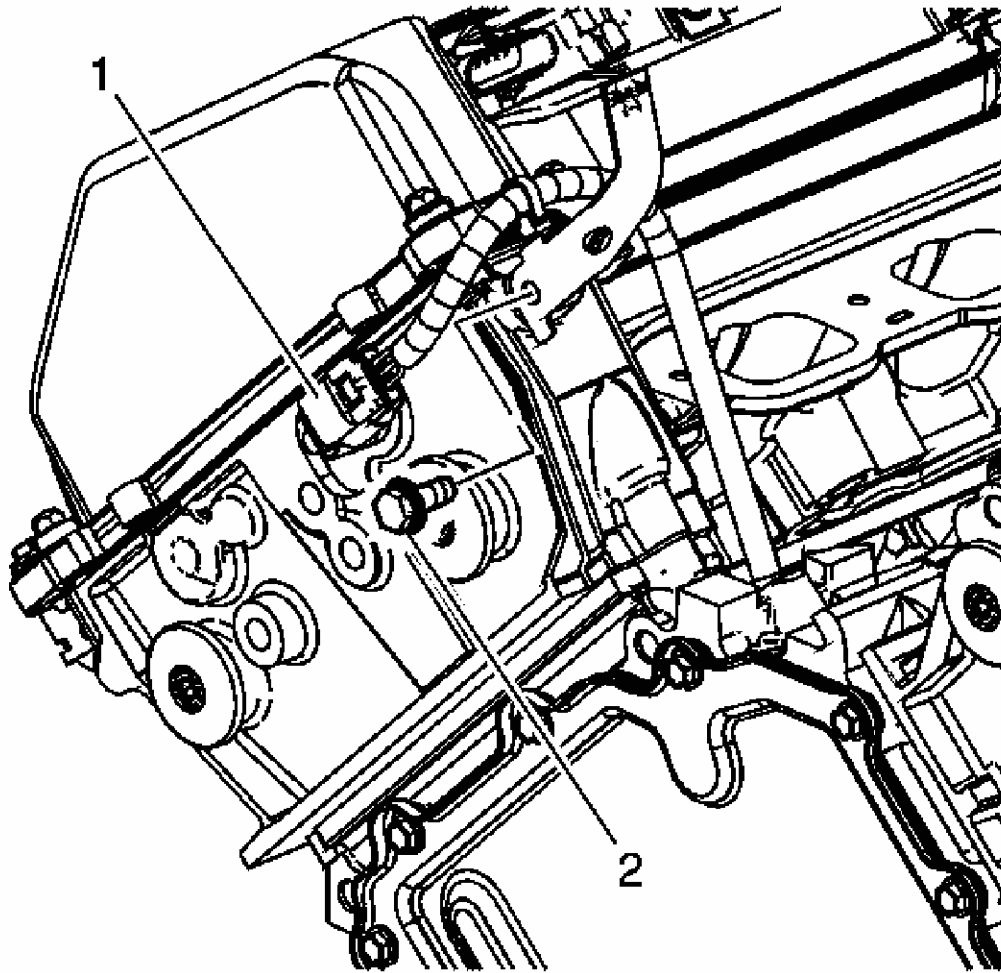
Identifying Crankshaft Position Sensor & Wiring Harness
